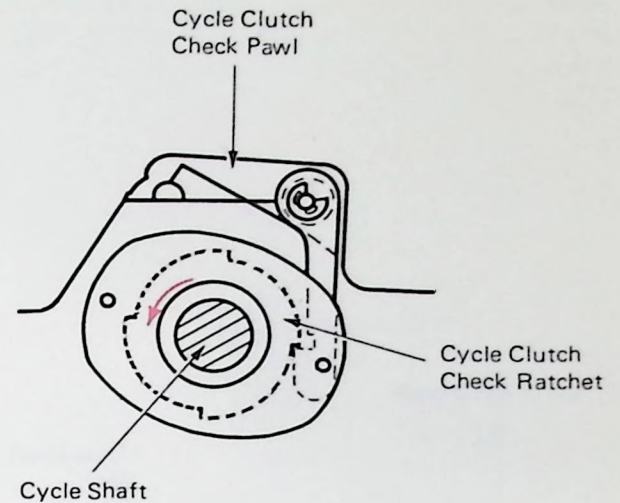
Cycle Clutch Check Pawl (Right Side View)
